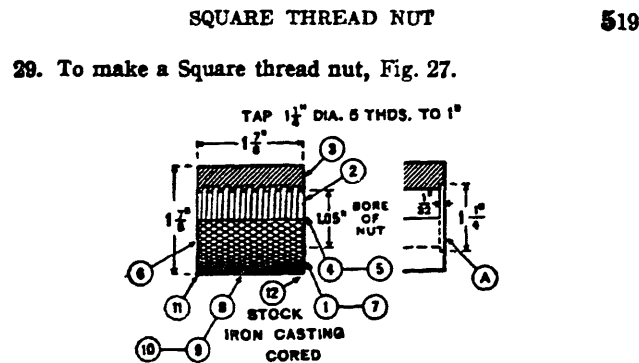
SCHEDULE DRAWING OF SQUARE THREAD NUT.
